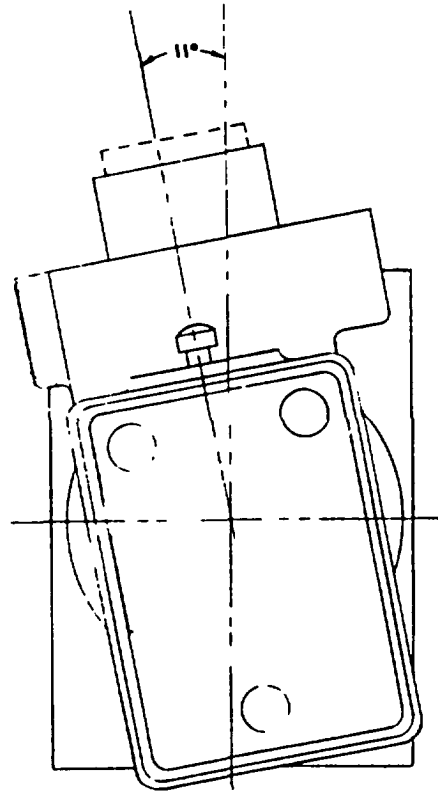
Pressure Switch Relief Module, Alignment of Outlet Housing to Adapter Body, End View
